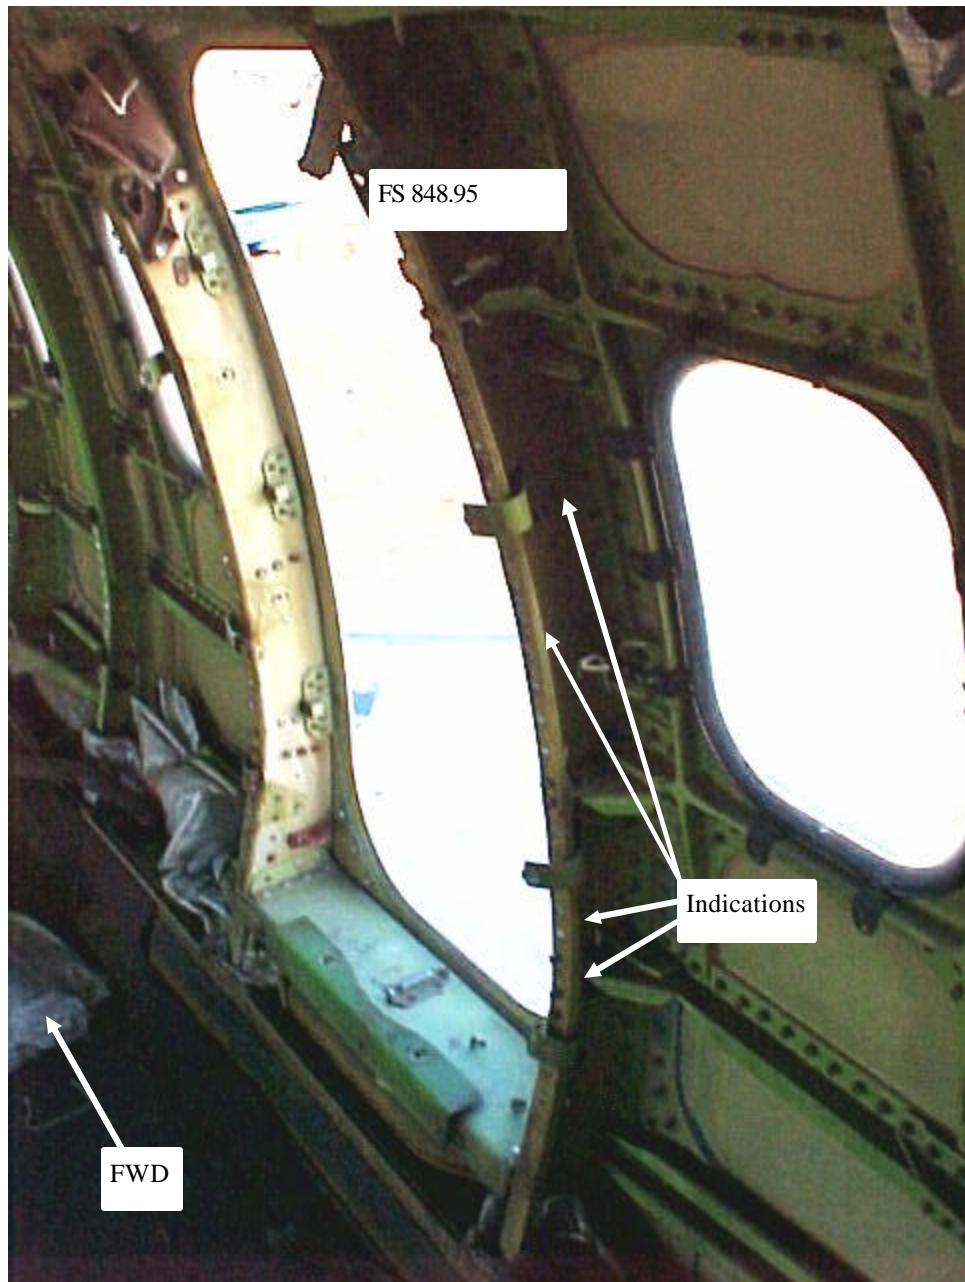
Photograph of right side, aft overwing emergency exit door frame. Detailed visual inspection discovered four indications on the aft side.
